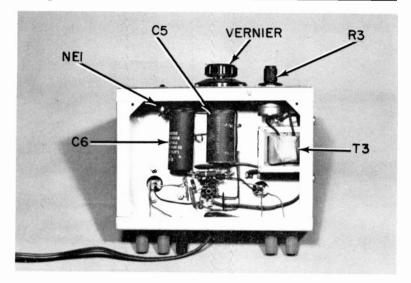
Under chassis view of the booster showing parts placement. Note that power transformer T3 is mounted on a side flange. Filter capacitors C5 and C6 are mounted to terminal stips.
